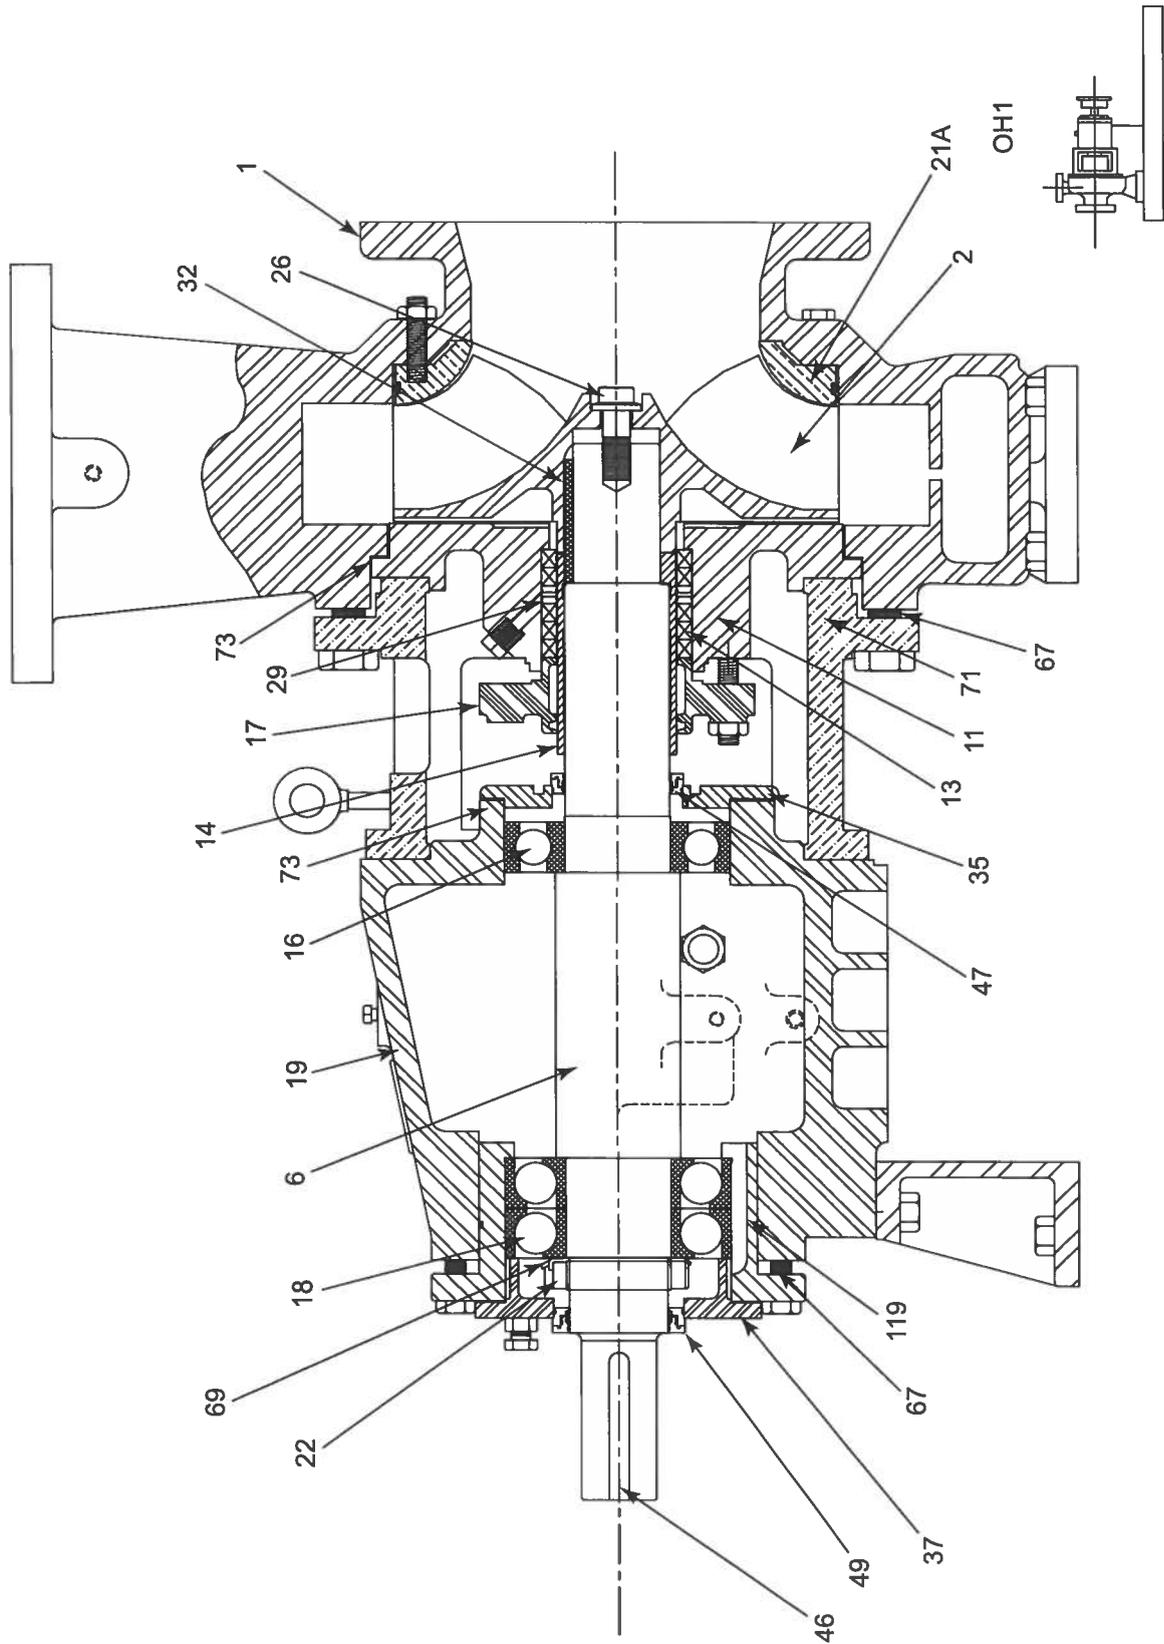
Stock pump — flexibly coupled — single stage — foot mounted
